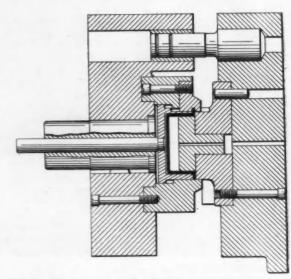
Typical Cross-Section of Die All Blanking and Trimming Dies and Almost All Forming Dies Are Equipped with Hardened and Ground Steel Liner Pins and Bushings. The Shanks Are of Steel and Are Inserted with the Shoulder at the Bottom To Prevent Their Pulling Out
